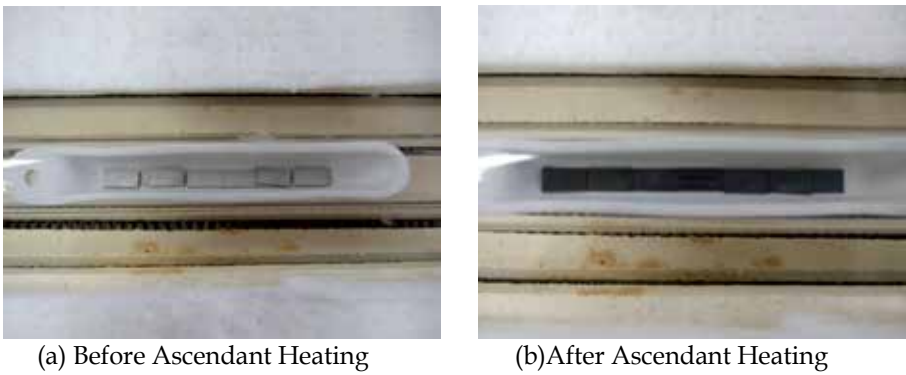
Photographs of the Inconel 718 Test Pieces Before and After Ascendant Heating test
